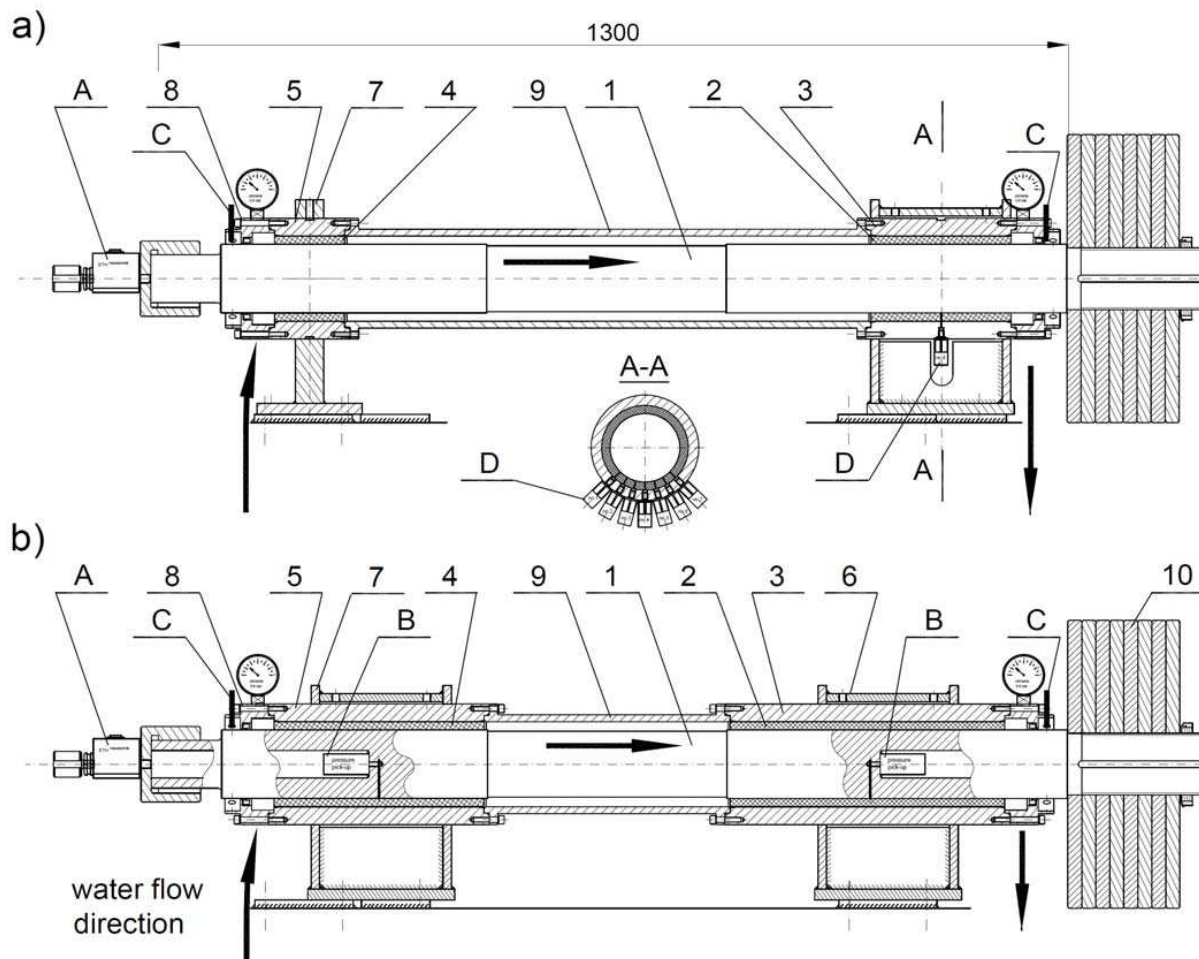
Stand for testing propeller shaft unit - shown in two variants, 1 - main shaft, 2 - stern tube aft bearing, 3 - stern tube aft bearing housing, 4 - forward bearing, 5 - forward bearing housing, 6 - aft bearing support, 7 - forward bearing support, 8 - cover with seal, 9 - bearing bush coupling, 10 - loading steel discs - representing propeller weight
